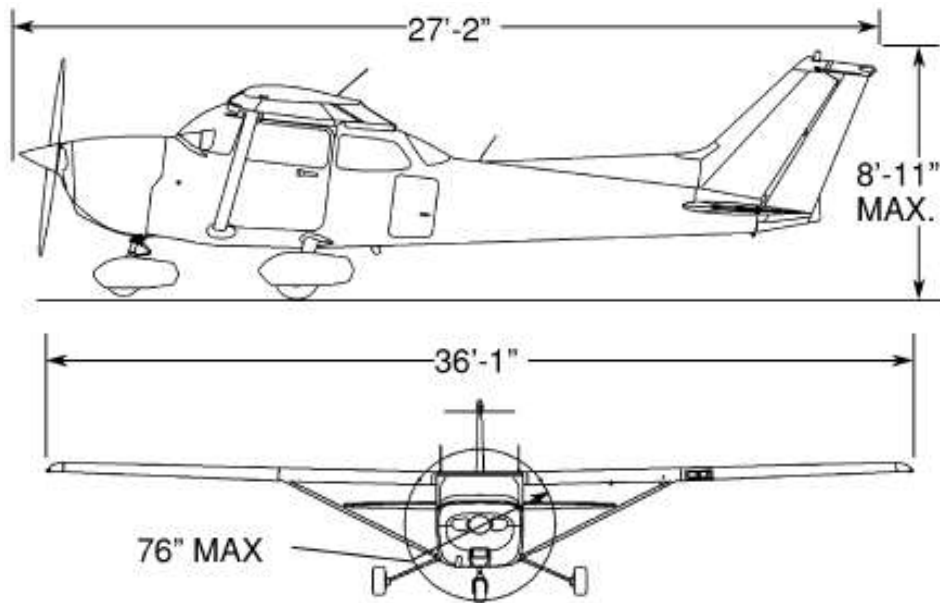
Sketch of Cessna 172S from POH showing overall dimensions and aircraft shape.
